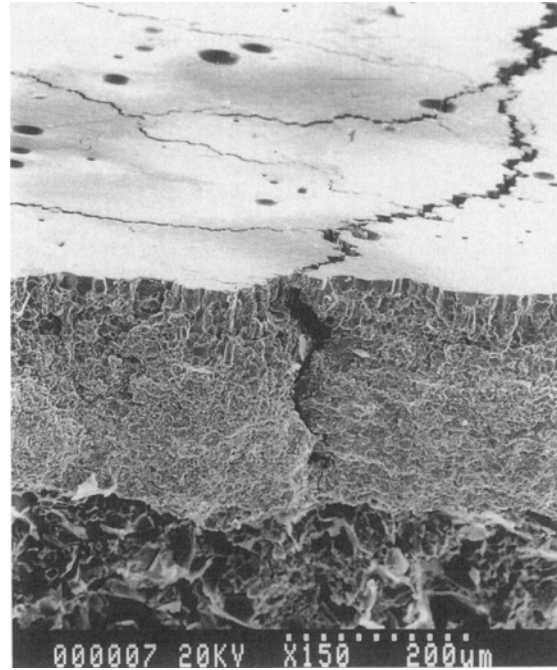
Fracture surface of a crack in the treated layer
